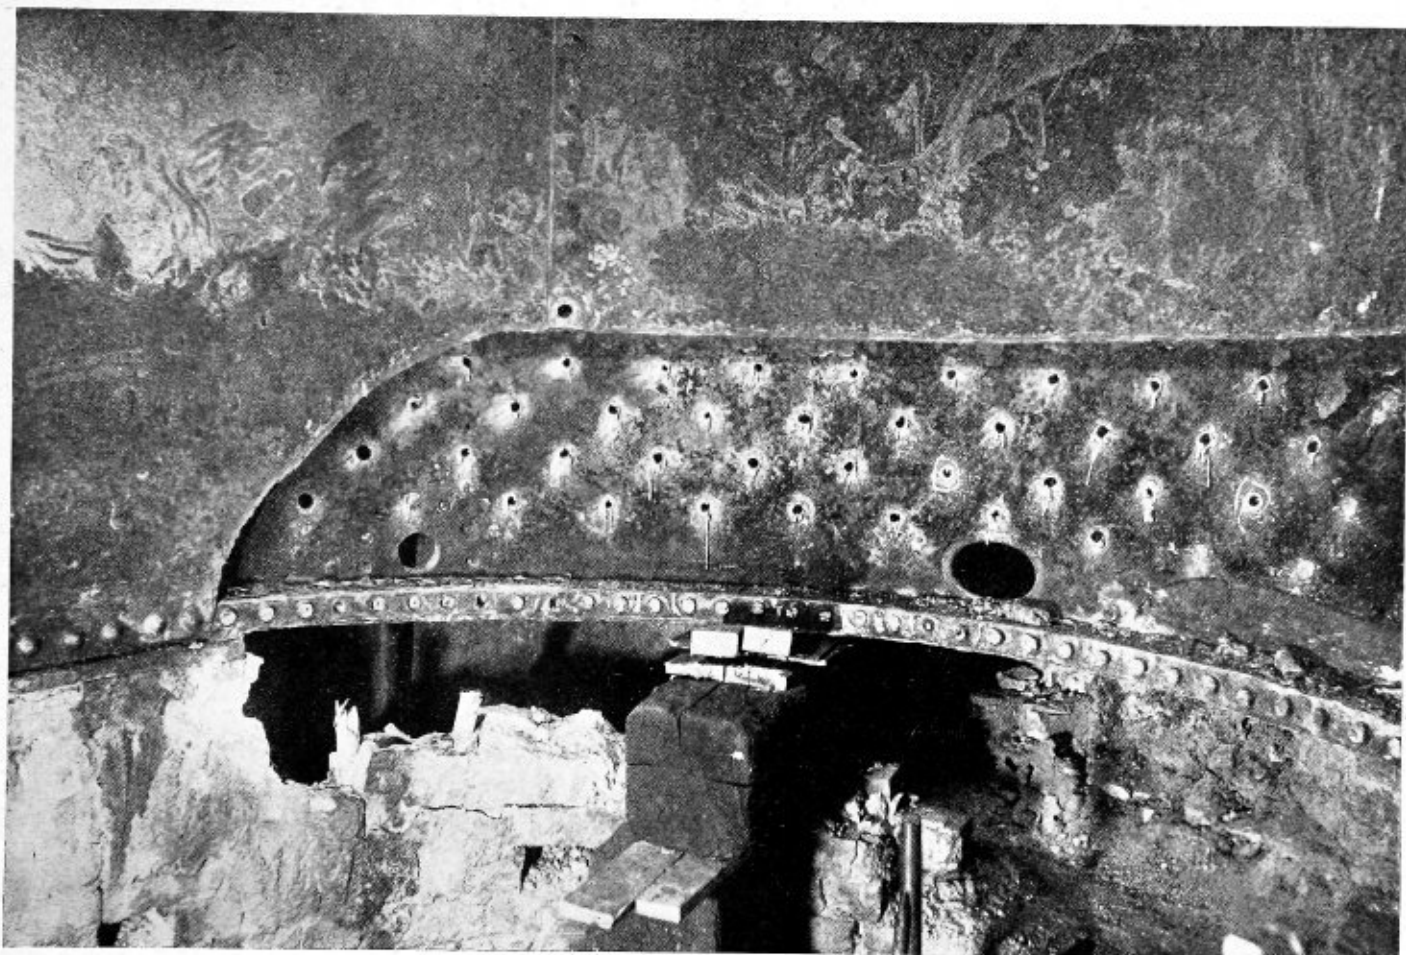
Interior of Firebox After Staybolts Have Been Burned Out and Sheet Cut Away with Oxy-Acetylene Torch for Patch
